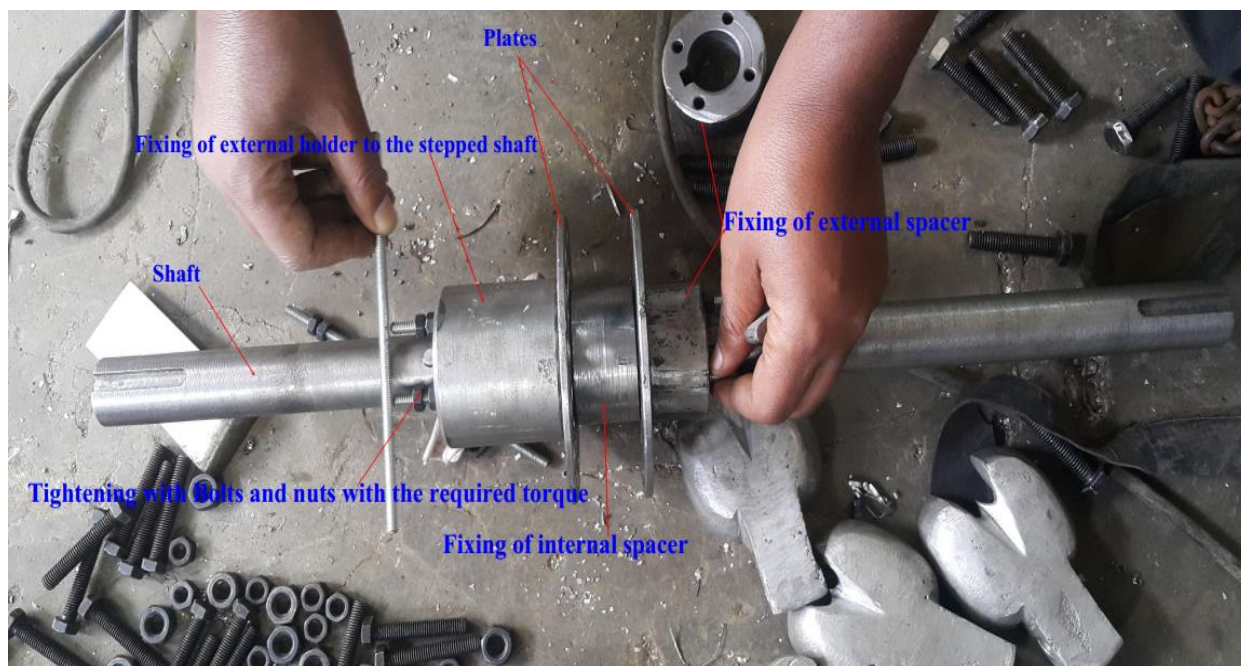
Assembly of runner plates, and spacers on the shaft.
